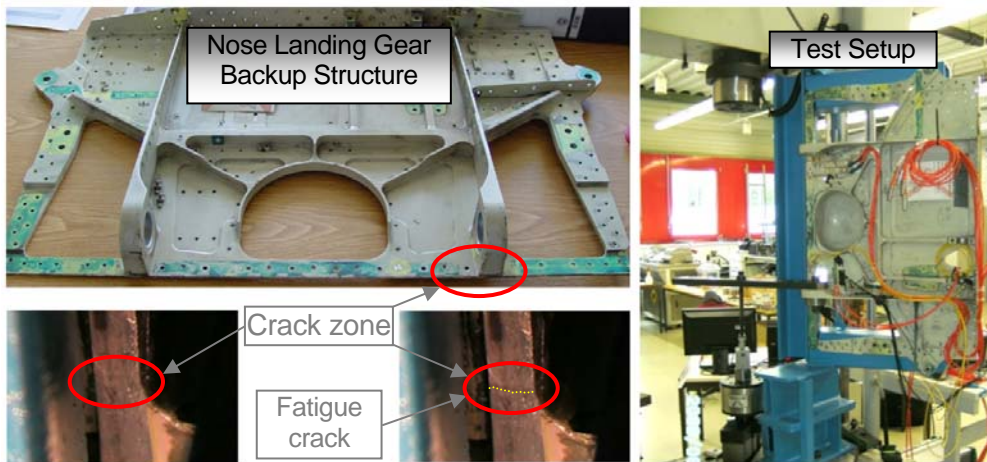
Nose Landing Gear Backup Structure mounted into test machine.
